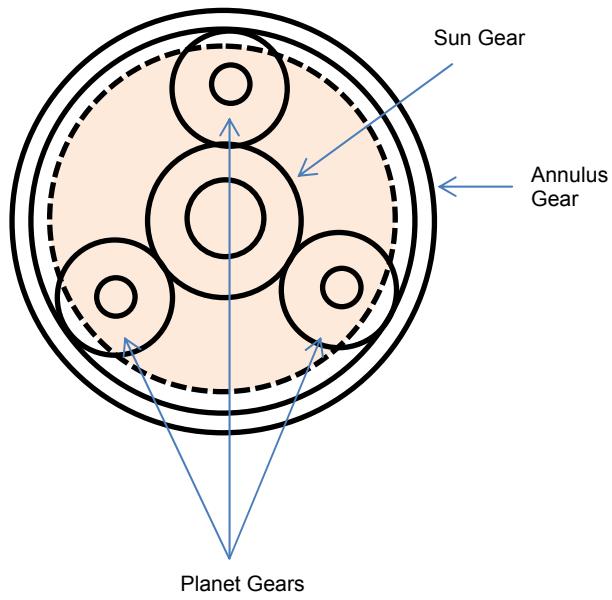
Epicyclic gear system provides high gear ratio within a short distance. The gears are oil field and hydraulic protected. In this drawing the planet carrier assembly is hidden.
